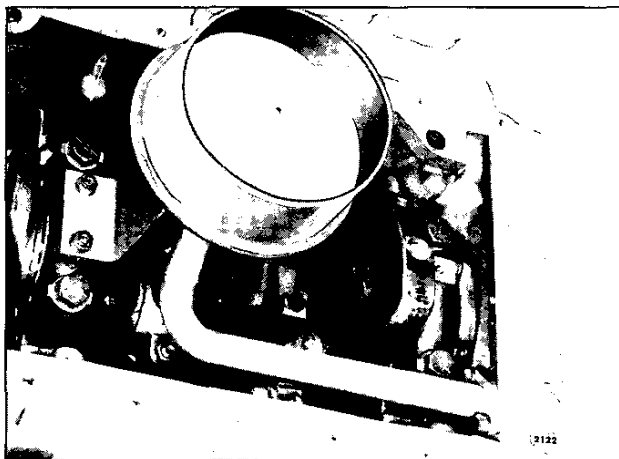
Typical Oil Pump Inlet Pipe and Screen Mounting
